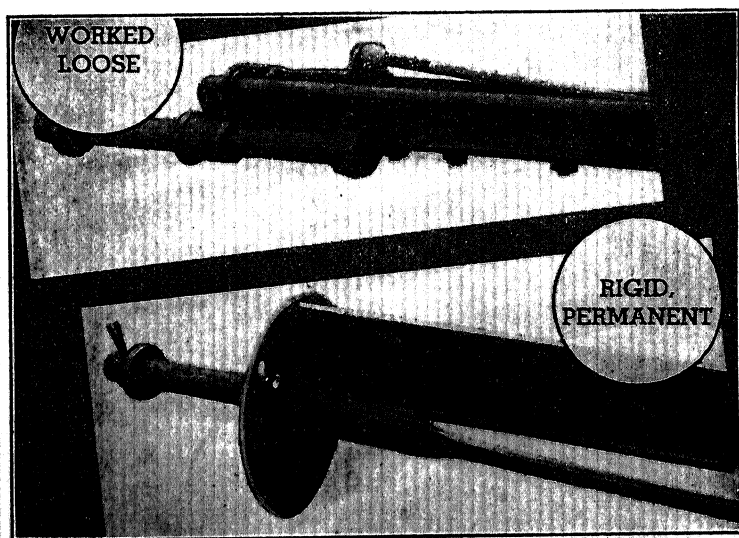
The old axle construction of this hay rake consisted of an assembly of castings and a threaded truss rod. The new design is a welded unit of 30% lower cost and permanent construction.
